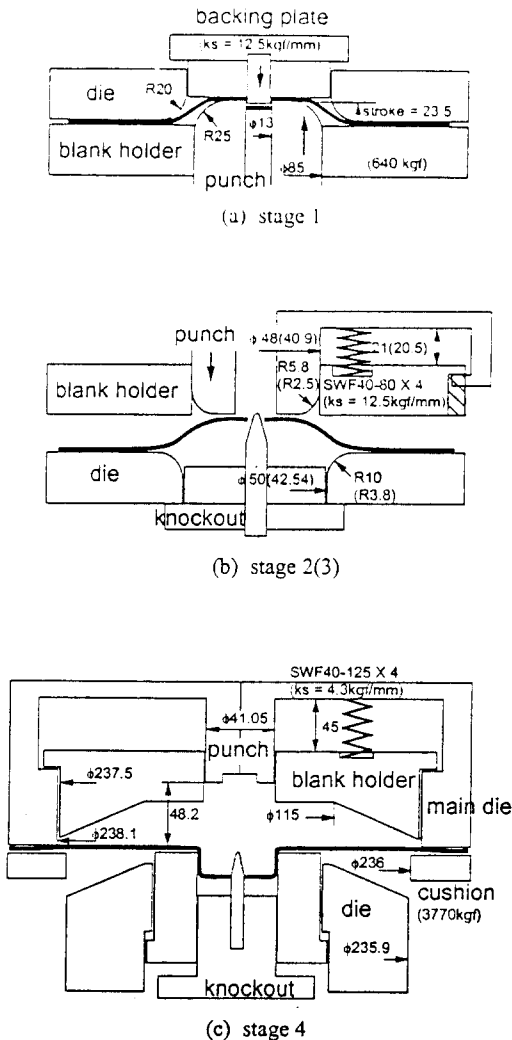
Geometry and blank holding conditions of the tooling for the multi-stage deep drawing.
